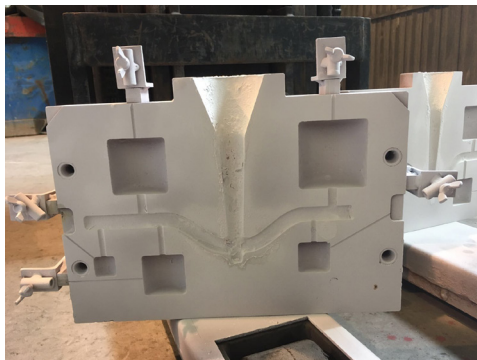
Photo of one half of metallic mold designed for casting test cylinders with different thermal moduli
